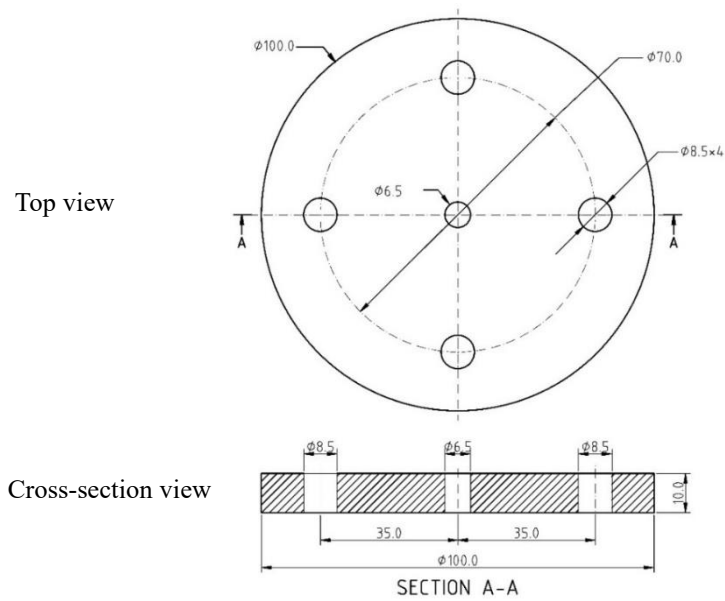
The engineering drawing of the top plate of the die (unit: mm).
